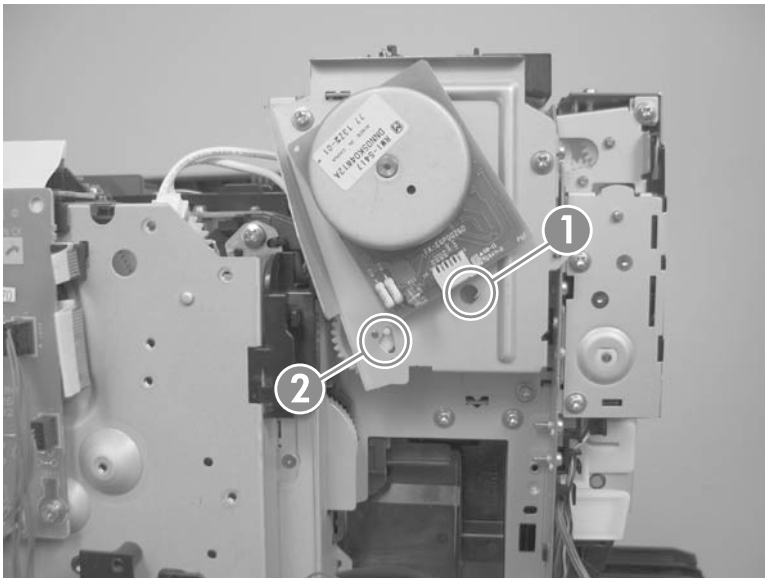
Remove the fuser motor assembly (4 of 4)
